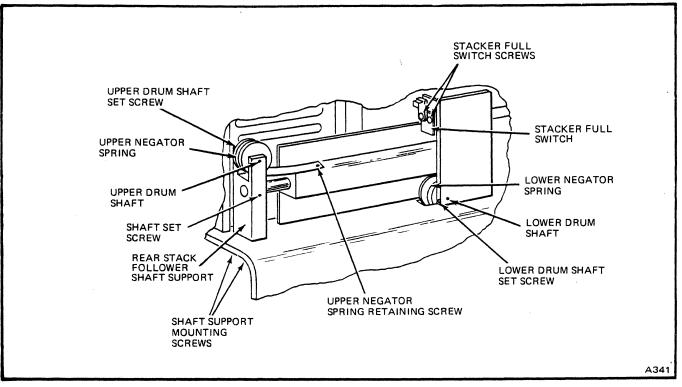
Stacker Negator Spring Replacement, Rear View
